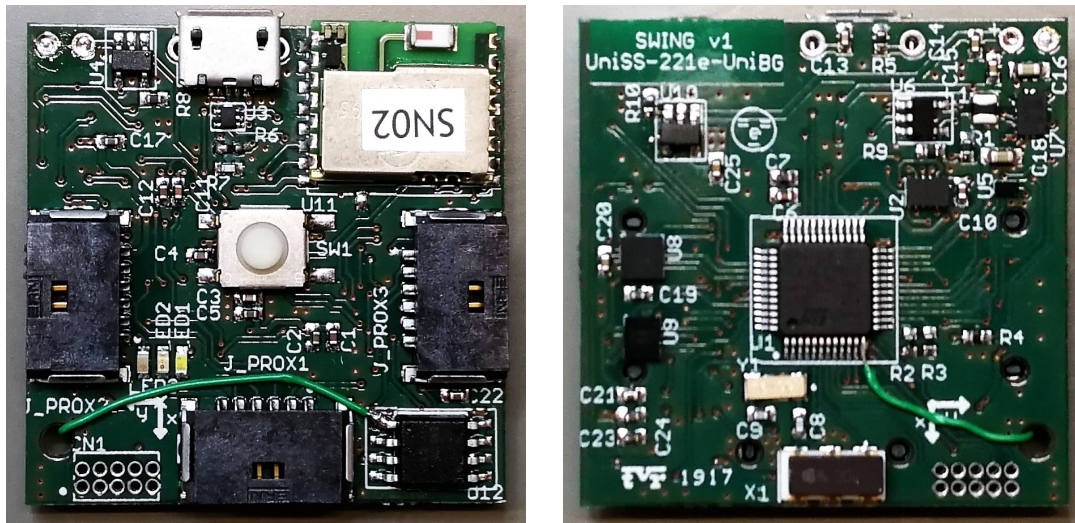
Top and bottom views of the fabricated and assembled SWING system.
